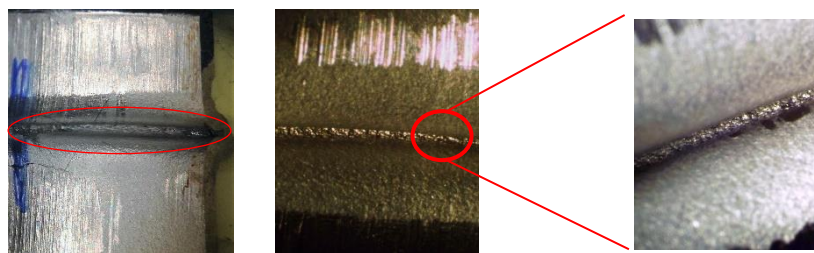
View of the inner surface of the bead (E3) through a stereomicroscope.
